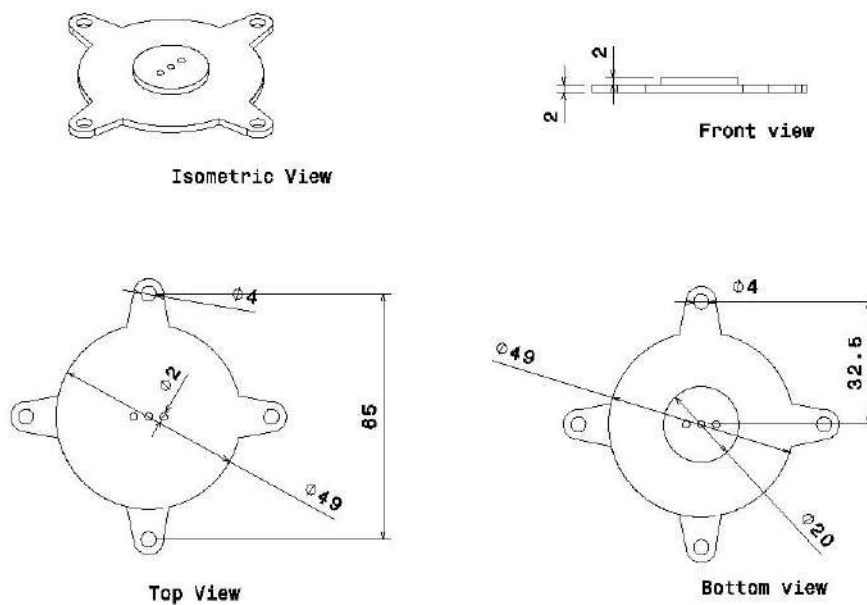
Superior lid part technical draw with isometric, front, top and bottom views (units in mm).
